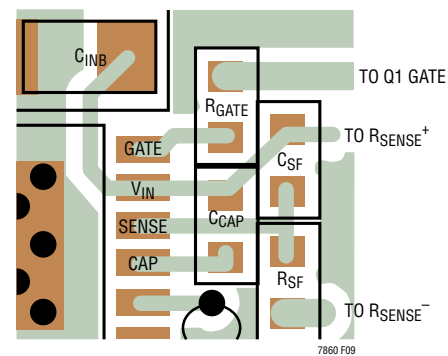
LTC7860 Recommended Gate Driver PCB Placement, Layout and Routing
